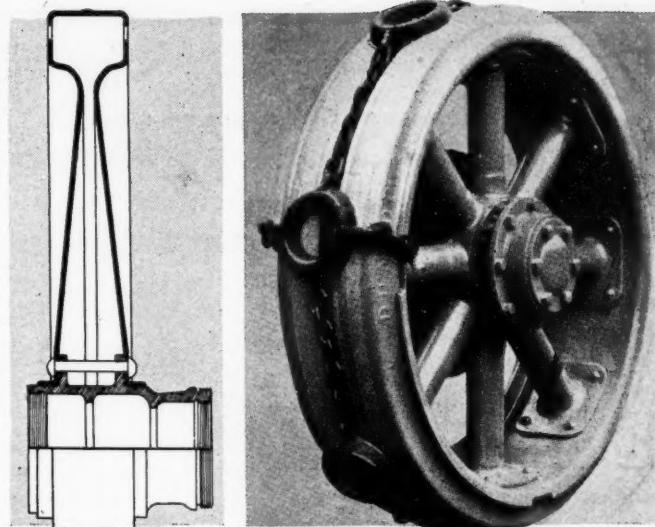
Left—Ruston Proctor presses disk wheel that has half rim in one piece with disk. Right—Non-slip device used by army trucks for getting out of soft places
